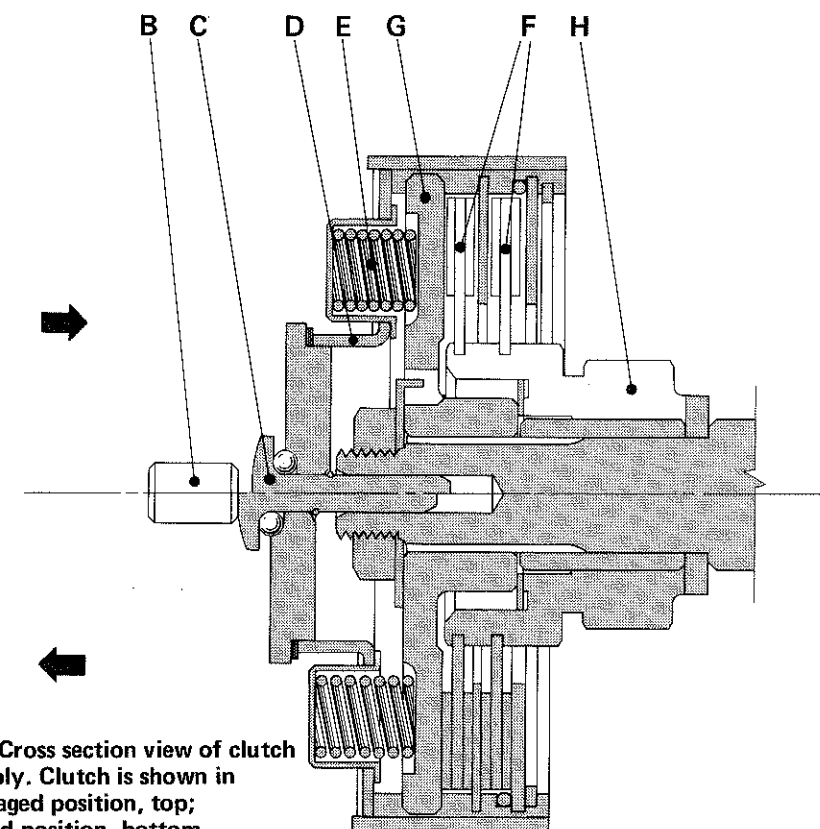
Cross section view of clutch assembly. Clutch is shown in disengaged position, top; engaged position, bottom.
